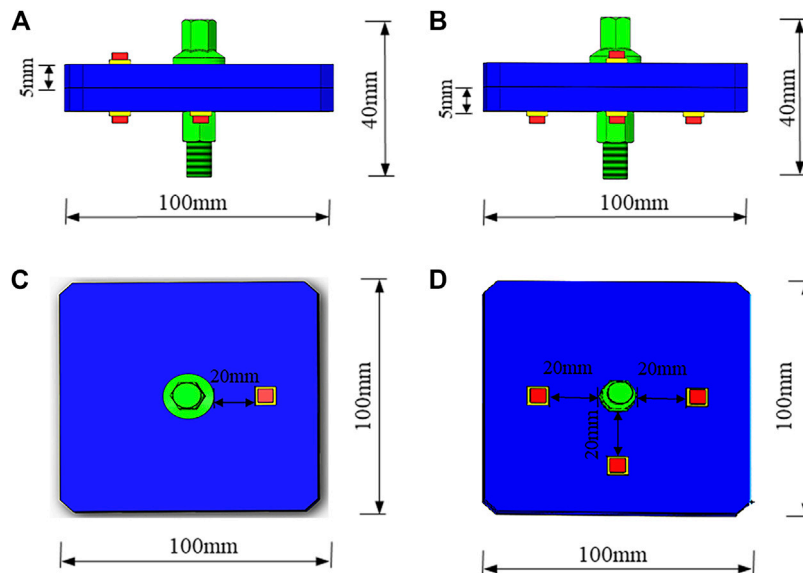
| Detailed geometry of the specimen. (A) Front view. (B) Side view. (C) Up view. (D) Bottom view.
